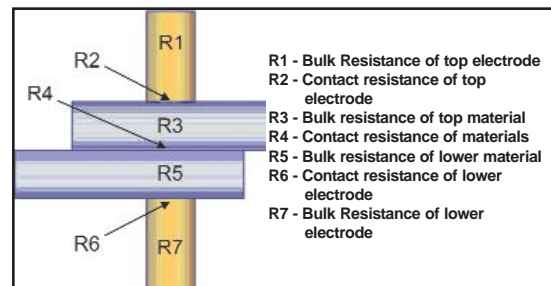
Indicates the seven resistances in a weld. The weld heat directly relates to the resistance stack up and specifically R4 between the weld interfaces. Variations in this stack up can be accommodated using inverters and linear DC power supplies.
